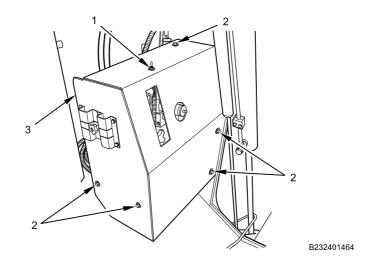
Rear Door/Ramp Hydraulic Pump Cover.
